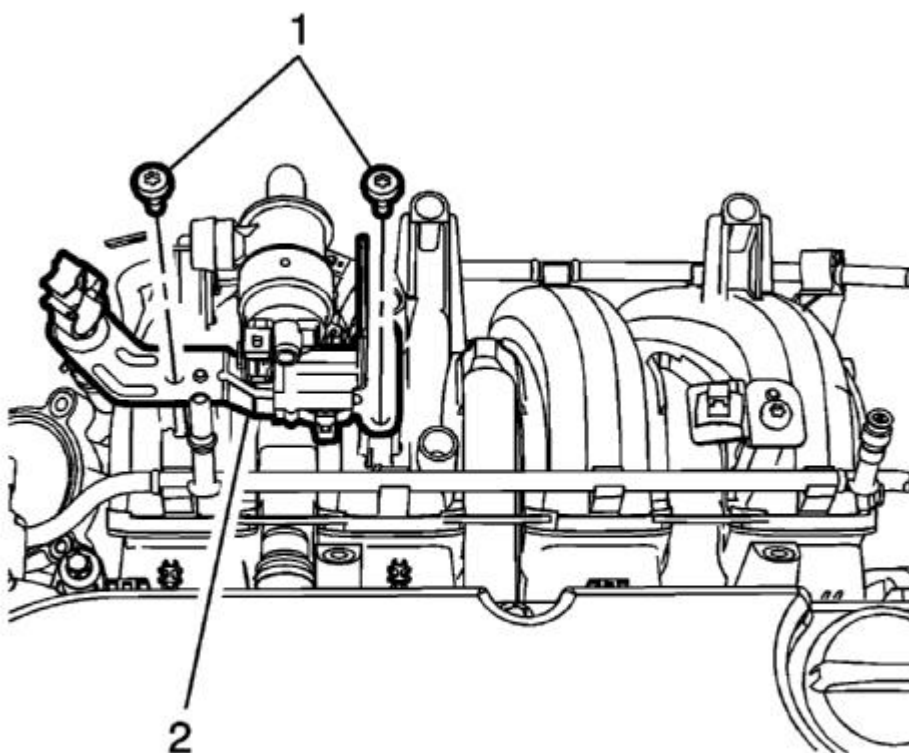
Evaporative Emission Canister Purge Solenoid Valve Bracket & Bolts
